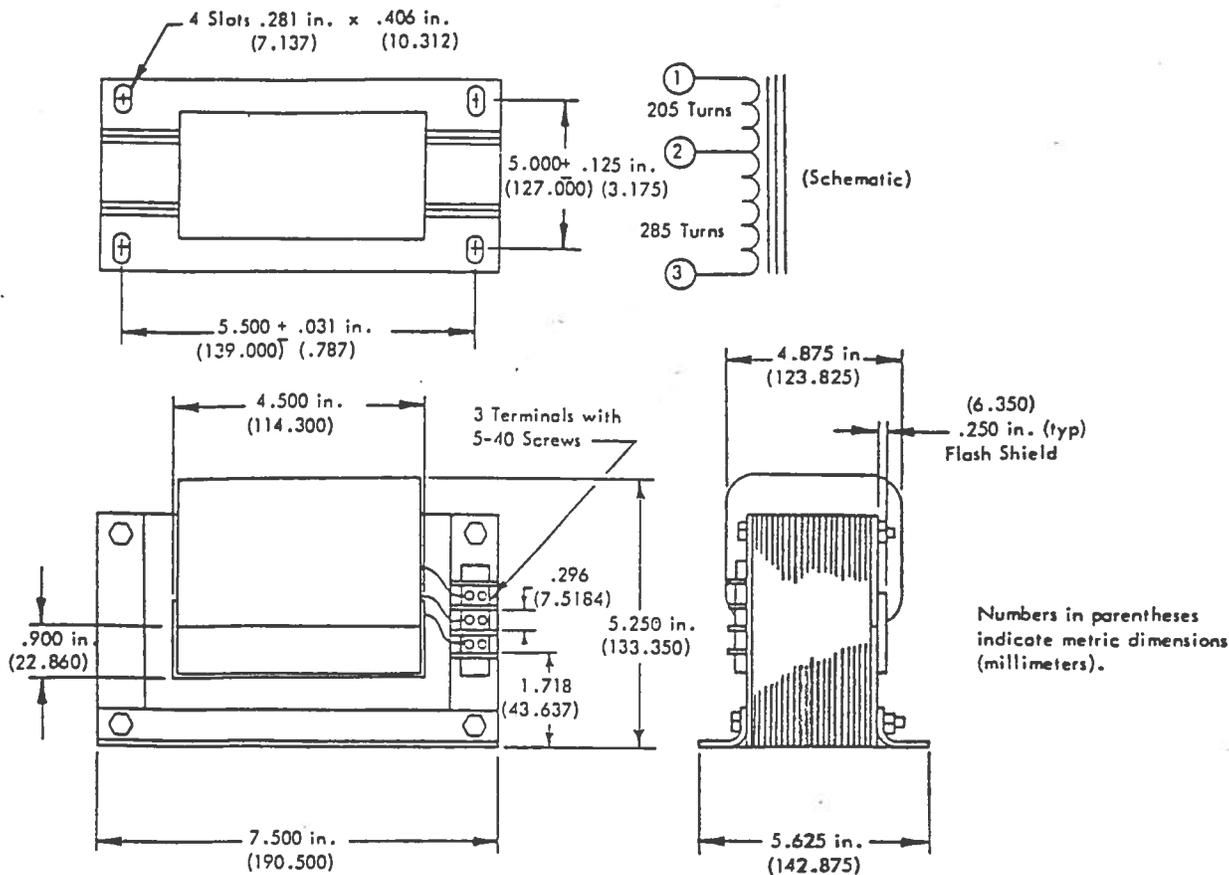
A. Outline Drawing - Current Transformer Pt. no. BE 15486-001
